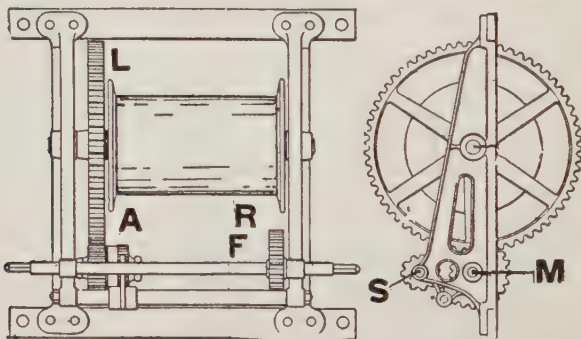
,201.—Crab or hand winch consisting of single reduction gearing with drum, brake, pawl, and hand cranks.
